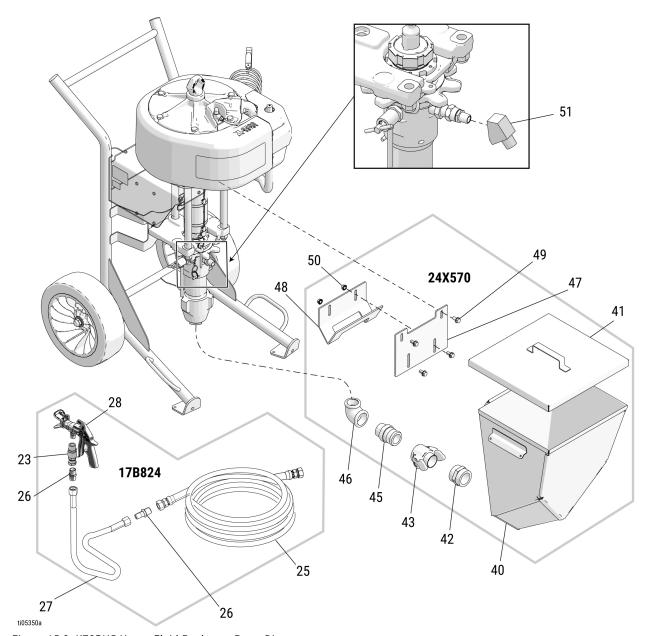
K70PH5 Heavy Fluid Packages Parts Diagram
